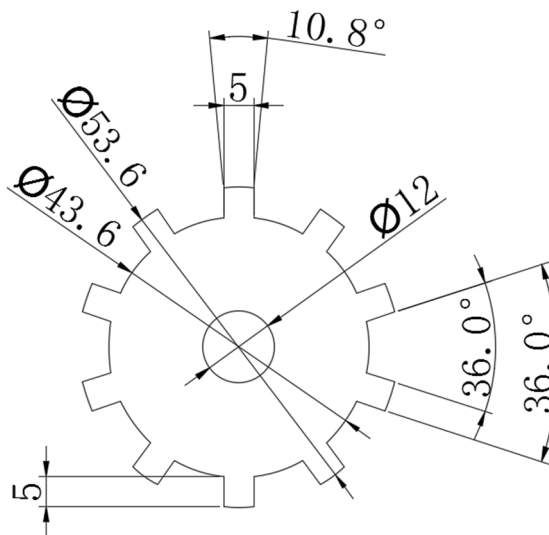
10-pole rotor dimensions for 6/10 FRPM machine.
